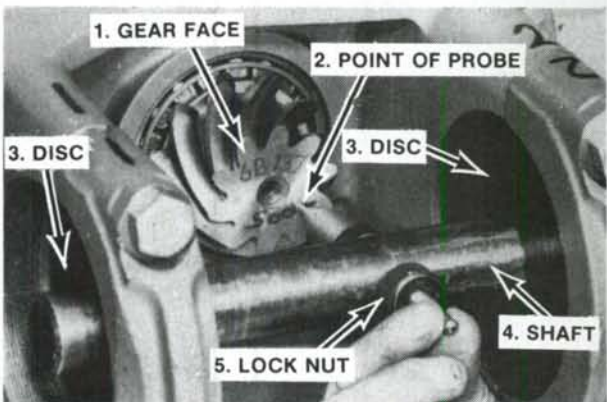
To set pinion shaft protrusion, install special tool set (DB-8208) in carrier housing as shown. Refer to Fig. 13 and to text to determine thickness of shims required to correctly set shaft protrusion.
